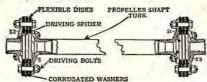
The Thermoid-Hardy flexible connection, or joints that are used at each end of the propeller or drive shaft, instead of universal joints.
